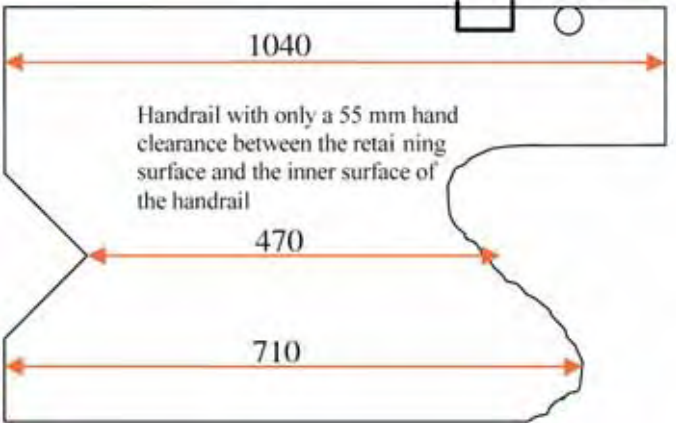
Figure indicating the dimensions of the entrance to the drivers' cab
